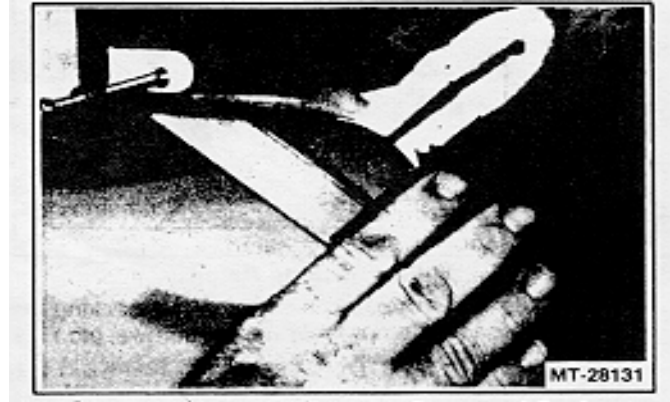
Sanding Exterior Damaged Surface (Crack Shown Typical)
